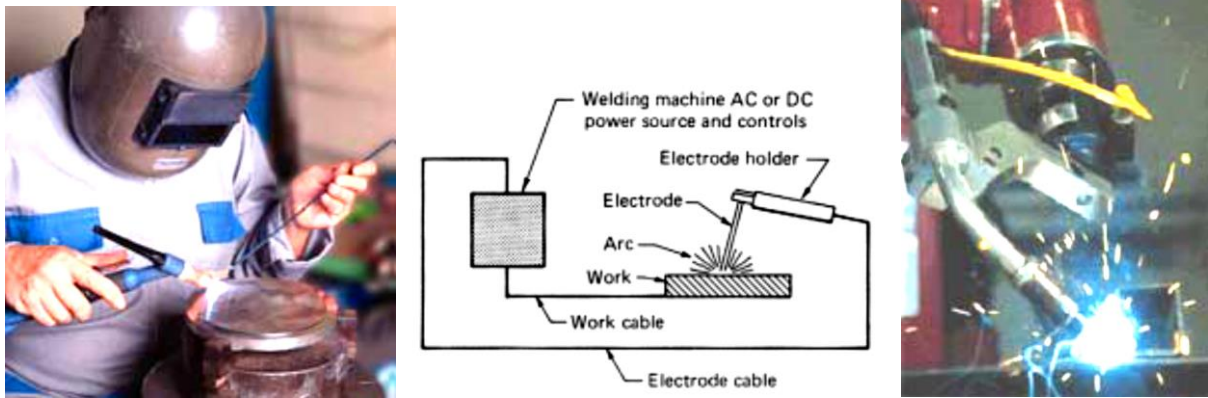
(a) Gas welding (b) Schematic of Arc welding (c) Arc welding is easier to automate using Robots (why?)
